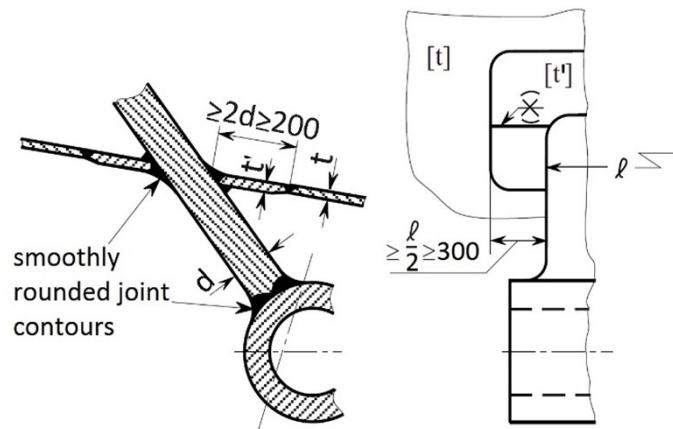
Shaft bracket with integrally cast welding flanges
